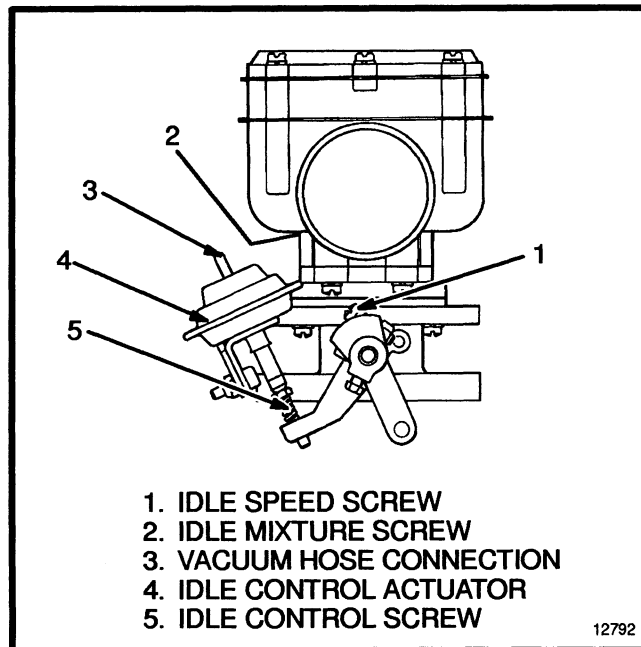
CARBURETOR ADJUSTMENTS, 2.2L ENGINE
